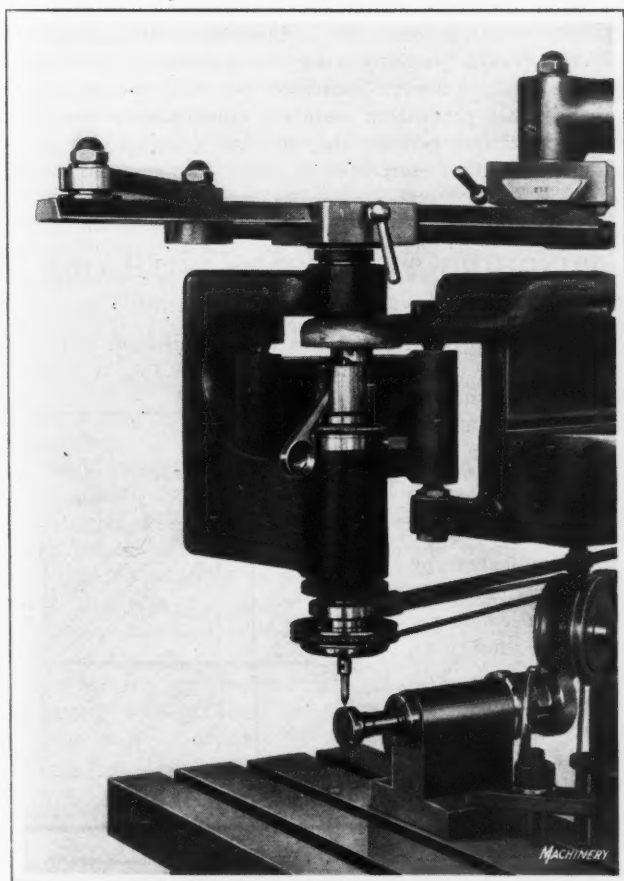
Attachment for engraving on Cylindrical Surfaces
